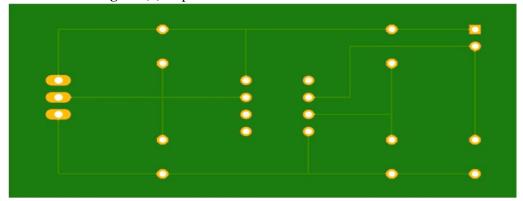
(c) Bottom side PCB view of Receiver circuit
